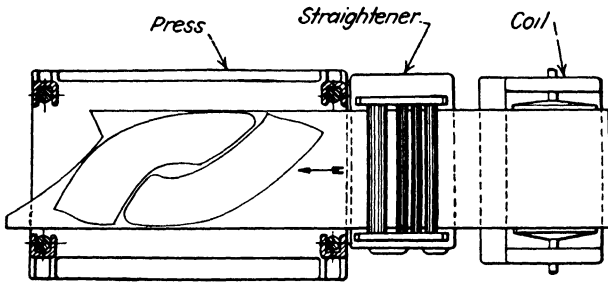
Plan view of a feeding and straightening machine in which wide sheet material is fed between the uprights of a double-crank press or into a four-point blanking press.
